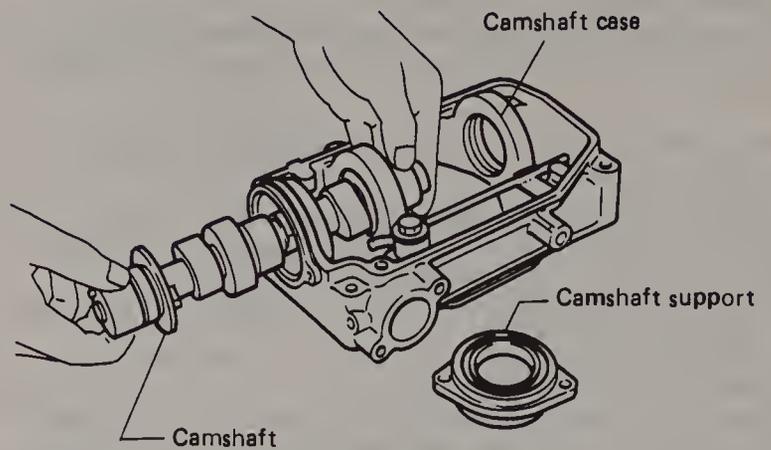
Unbolt the camshaft support and remove the camshaft from the case (Sec 5)
